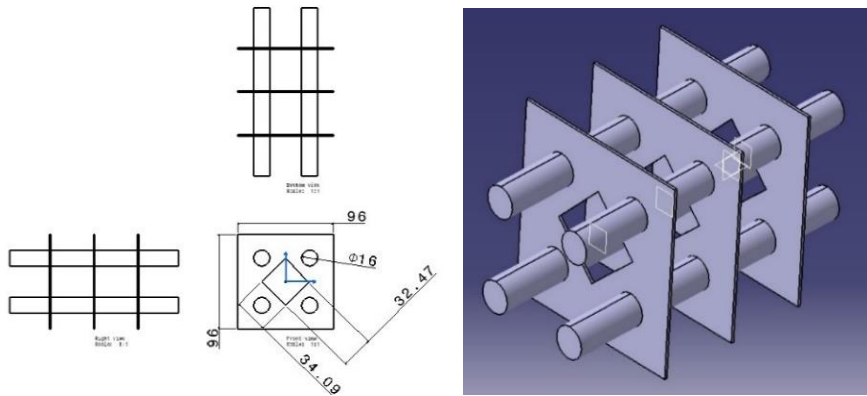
3D Model Tube and Finned Type Heat Exchanger with diamond cutout
